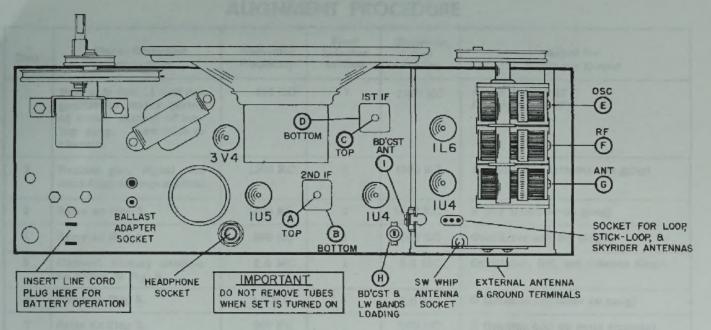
Top View of Chassis Showing Location of Alignment Adjustments and Tubes
